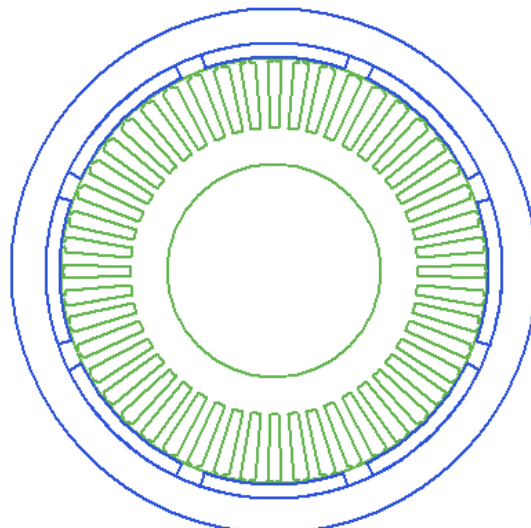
2D view of the surface mounted PMSM with outer rotor
